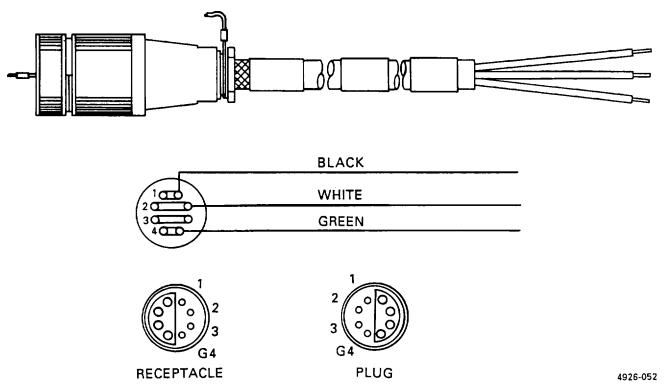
Cable Assembly CX-7705A/U (stub), drawing number SM-D-352157.
